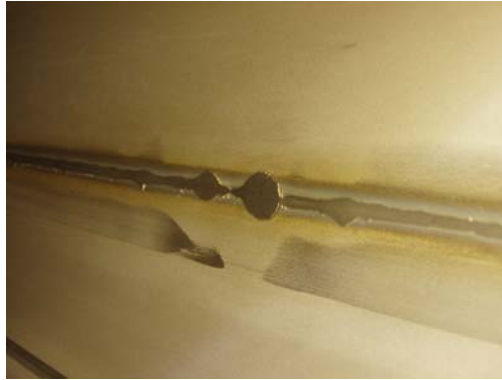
Natural weld seam defect on inner wall of tube
